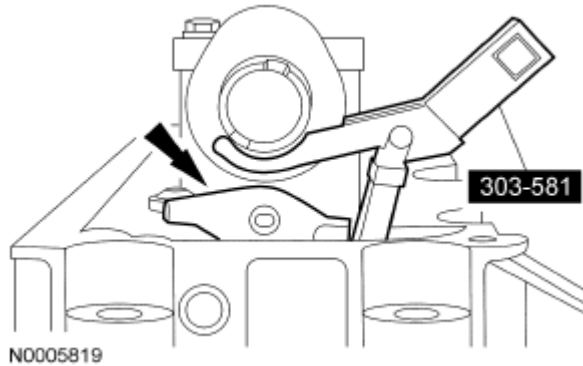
Locating Camshaft Roller Followers And Special Tools
